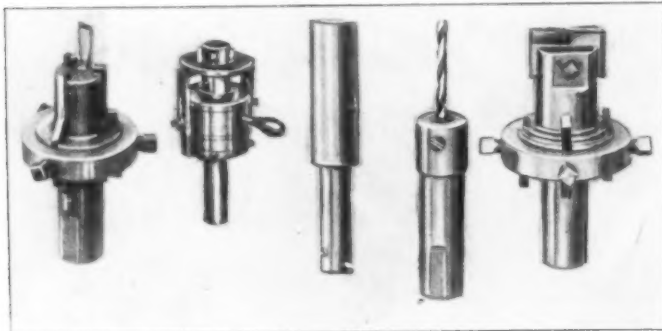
TAPS USED IN FIRST THREADING OPERATION ON SOCKETS.
